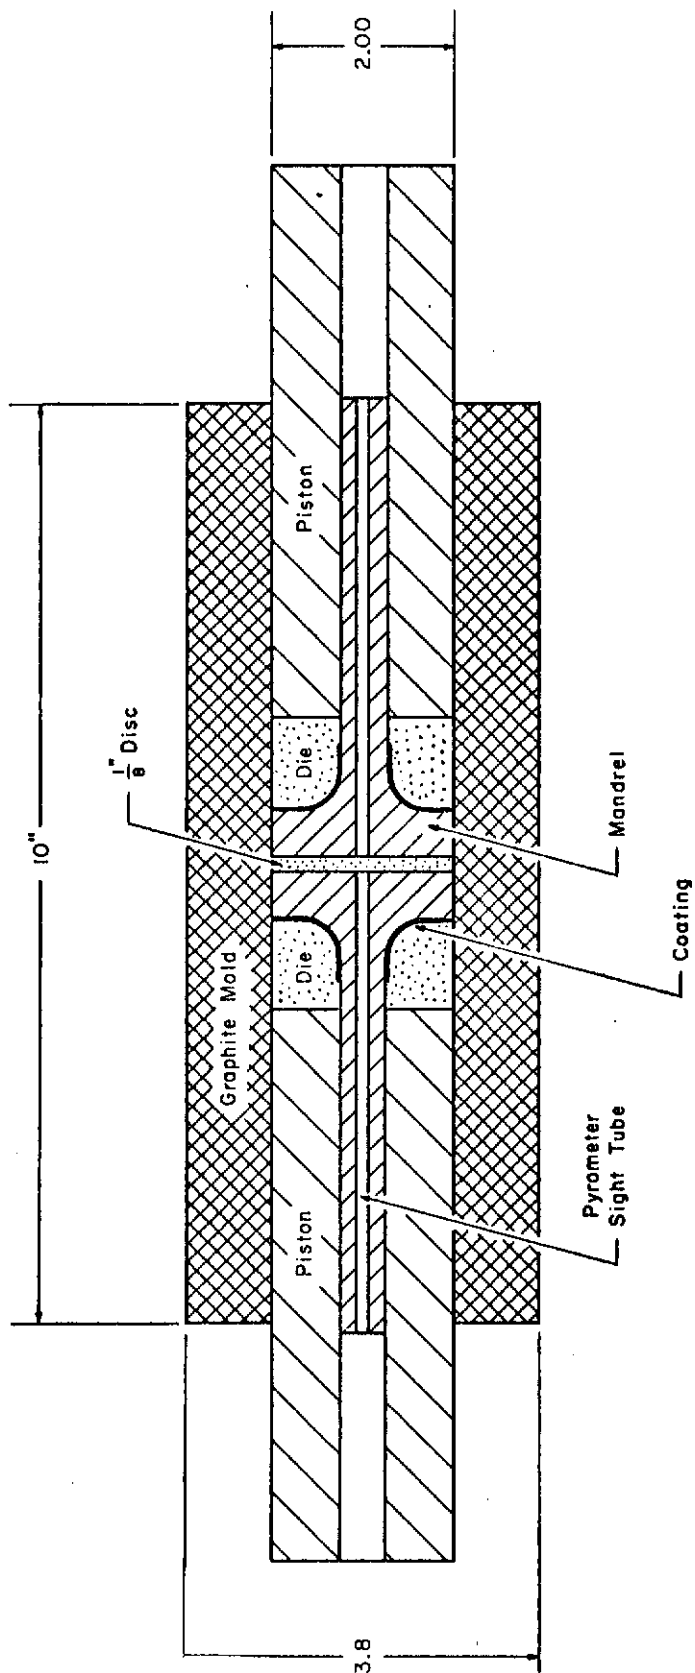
Hot Press Mold for Fabricating Two Coated Dies.
